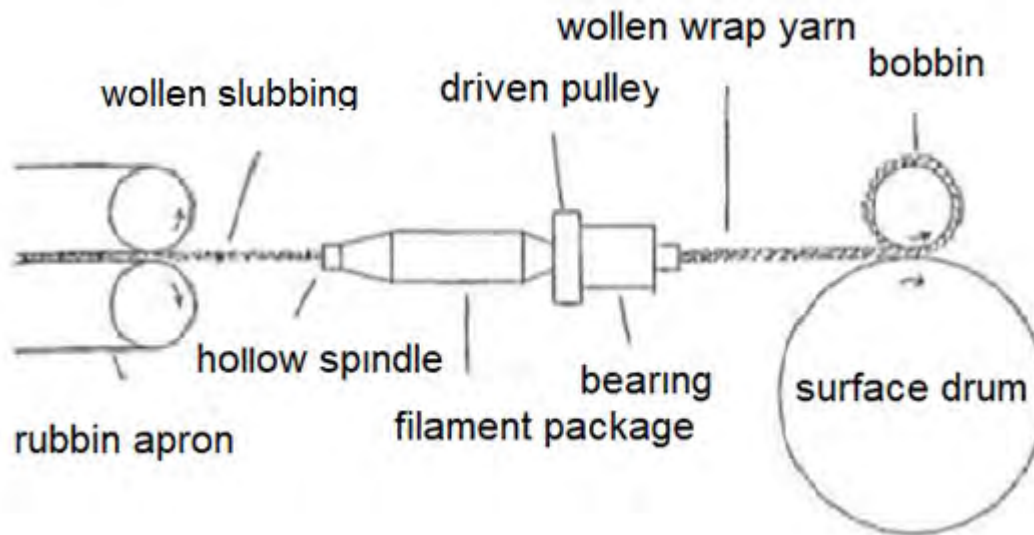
Principle of wrapped yarn production by using modified woolen technology (directly on condenser of woolen carding machine during forming of roving)
